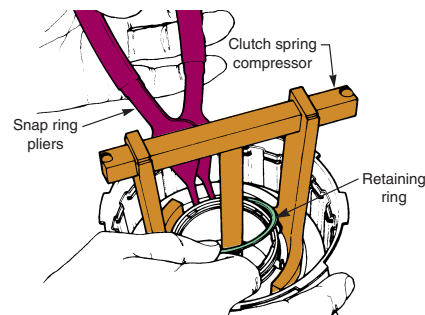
To reassemble the apply piston and return spring assembly, depress the return springs below the snap ring groove and install the snap ring. Sometimes it is easier to install the snap ring by hand or with a small screwdriver than it is to install it using the snap ring pliers. (Ford)
